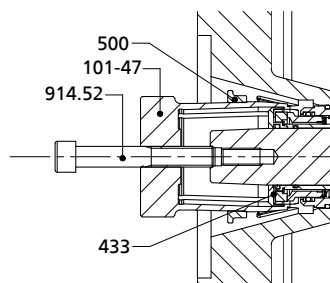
Removing the C022/025/11-4STQ double cartridge seal
